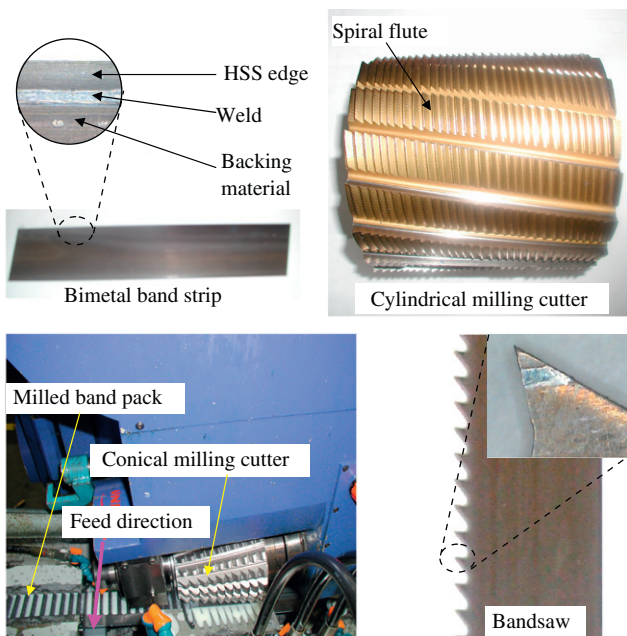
Bimetal band strip, milling cutter, milling machine and generated bandsaw teeth in the strip.
